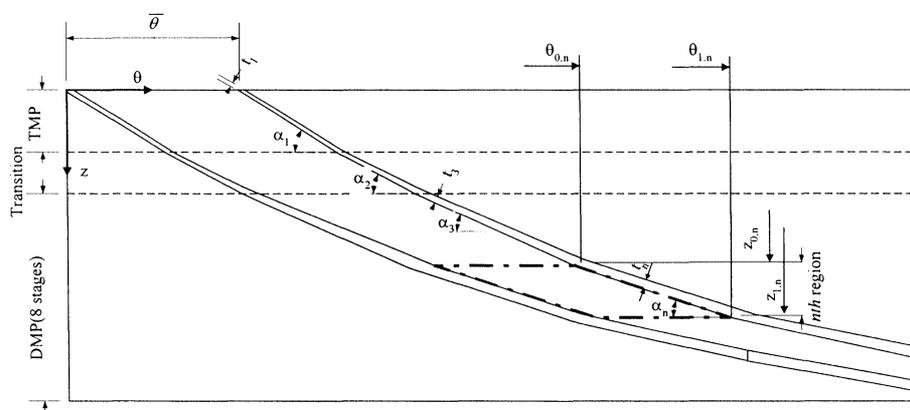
Auxiliary projective drawing of rotor geometry.
